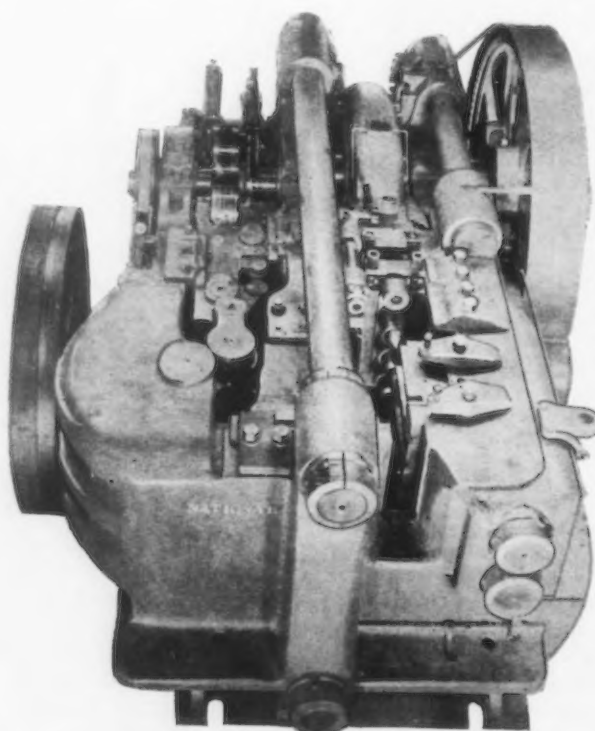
Horizontal Forging Machine or Bulldozer, Made by the National Machinery Co., Tiffin, Ohio
